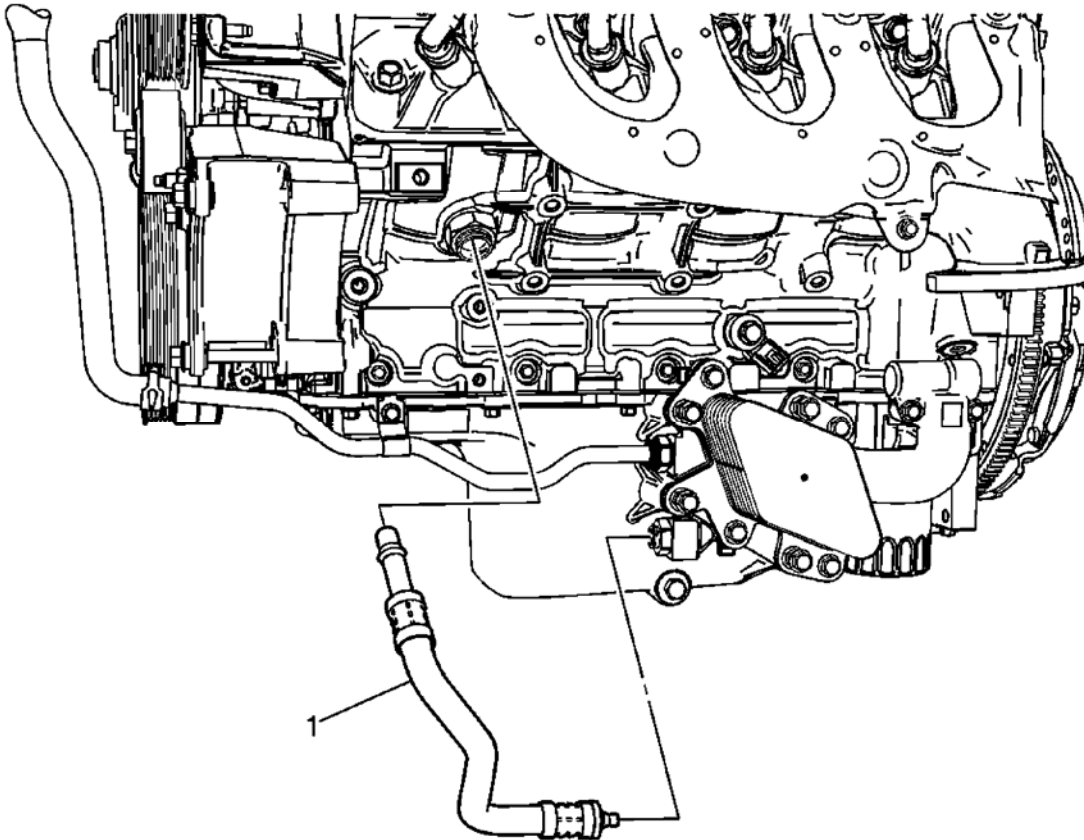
Engine Oil Cooler Coolant Inlet Hose (LS3)
